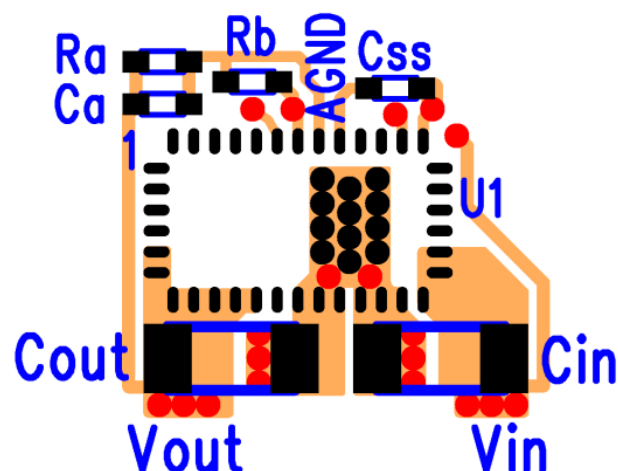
Top PCB Layer Critical Components and Copper for Minimum Footprint
